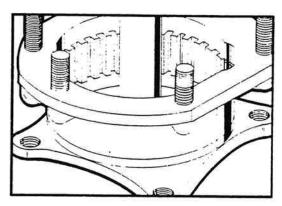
Drive Gear Removal from Drive Gear Bore.
